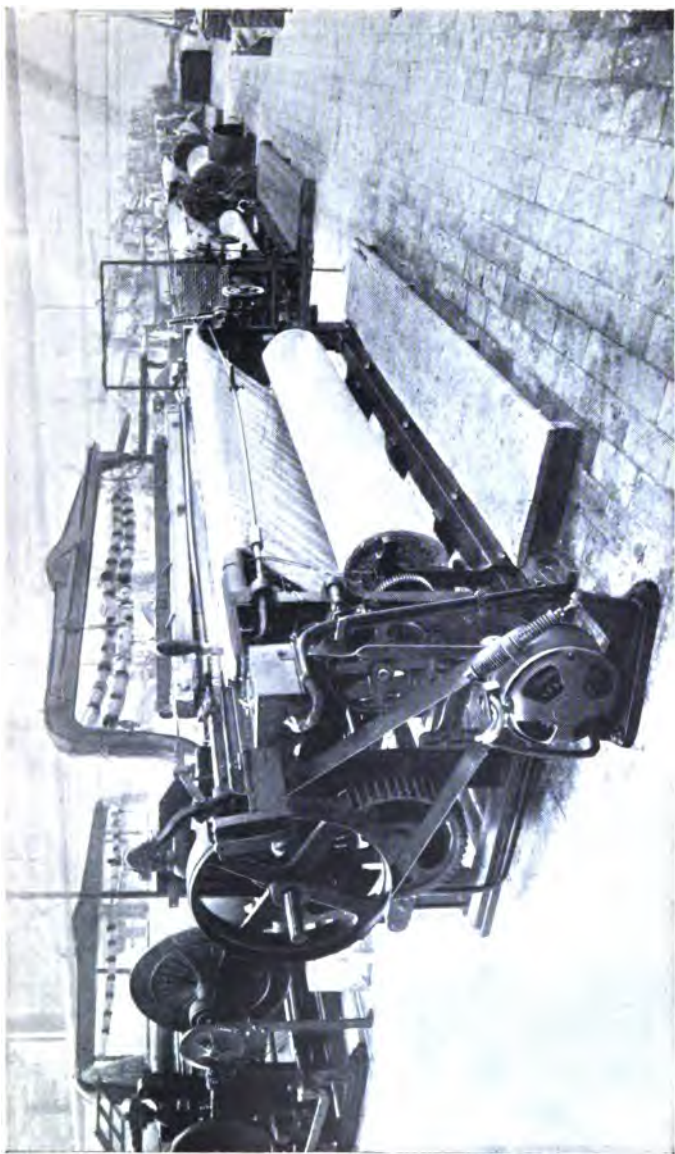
Induction Motor driving Jute Loom through Belting.
